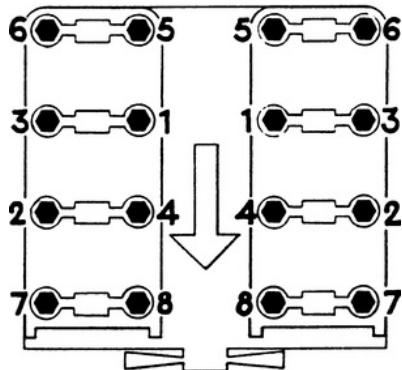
2.8L 6-cylinder engine cylinder head bolt tightening sequence
